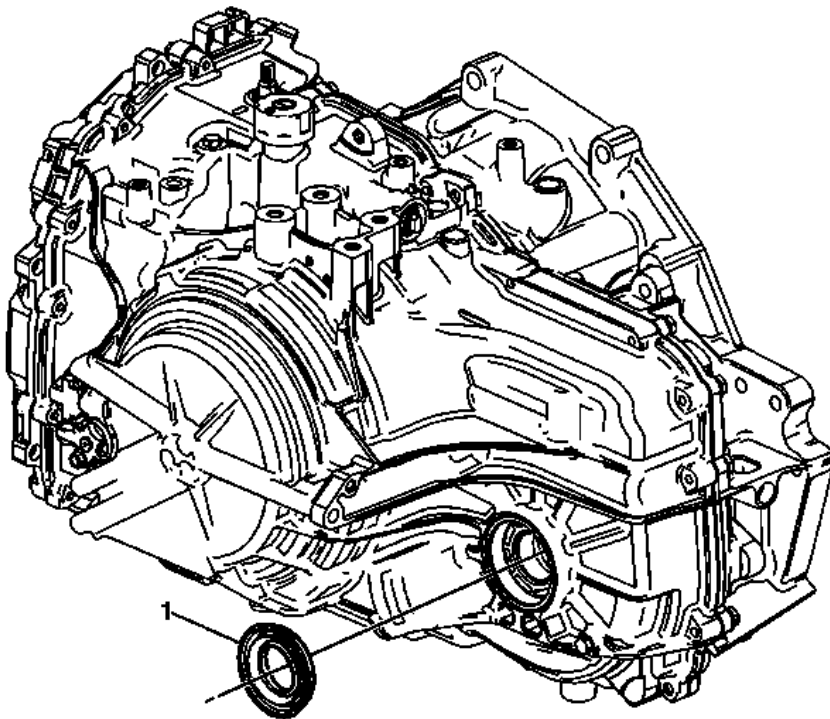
Identifying Left Front Wheel Drive Shaft Seal
